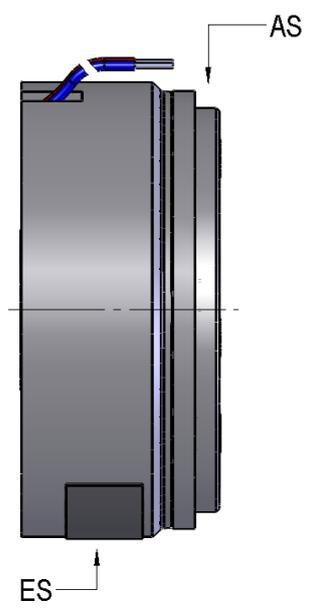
/1: High Torque brake types 86 611..P00 with armature type 800
